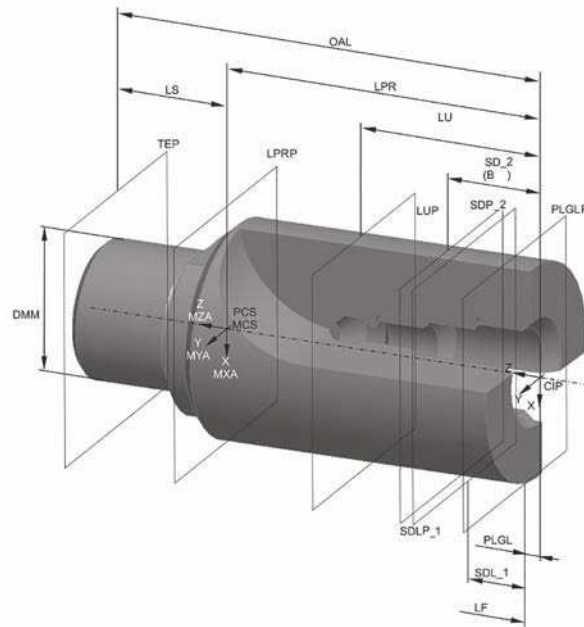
Chip flute and pocket seats of a bell-style reamer
